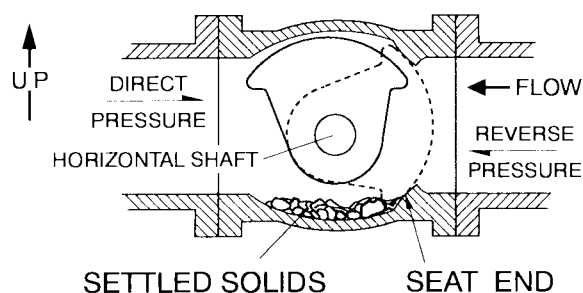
HORIZONTAL PIPE WITH SOLIDS
